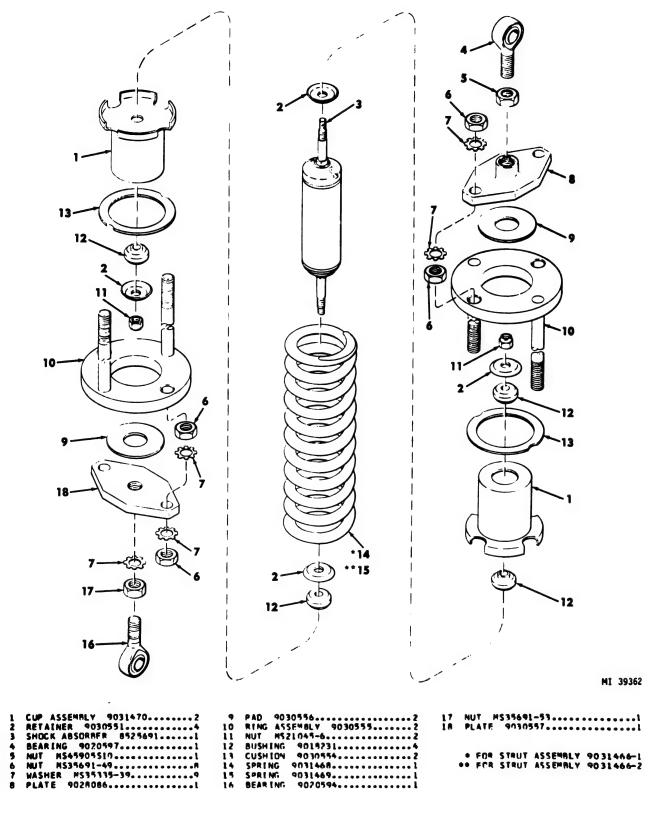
STRUT ASSEMBLY, SUSPENSION /9031466-1 AND 9031466-2/ /SEE FIGURES 126 AND 134 FOR NEXT HIGHER ASSEMBLIES/
